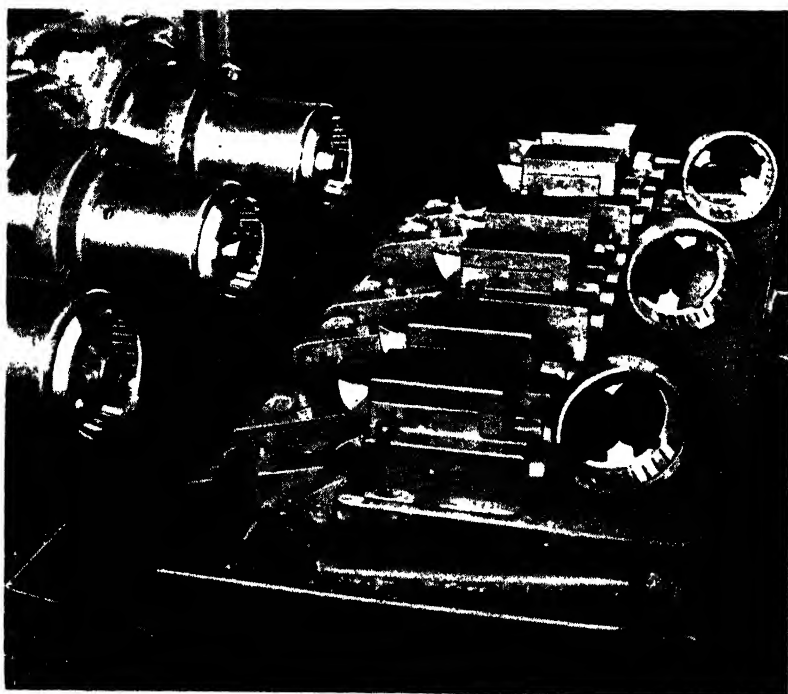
Tooling for Boring and Threading a Tapered Surface in Three Synchronizing Drums for Automobile Transmissions
